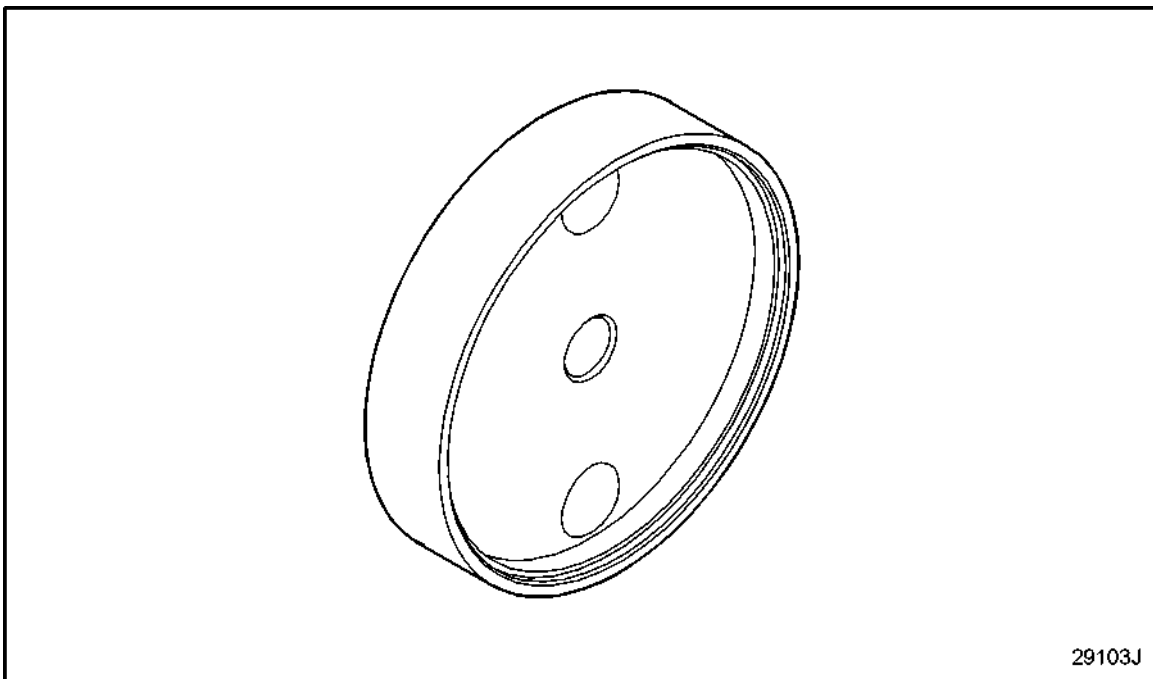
Front/Rear Seal Installer, J 4194-01
